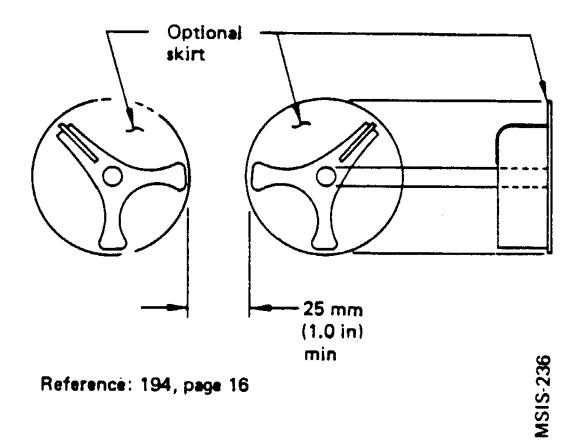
Valve Handle – Central Pivot Type
